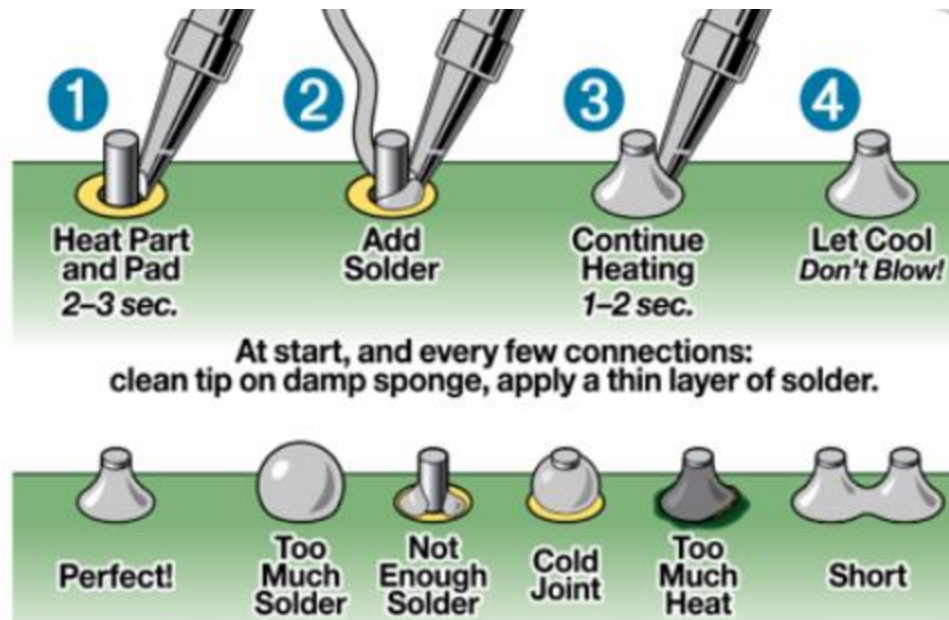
Proper Soldered Joints Reprinted (Permission from Adafruit)
